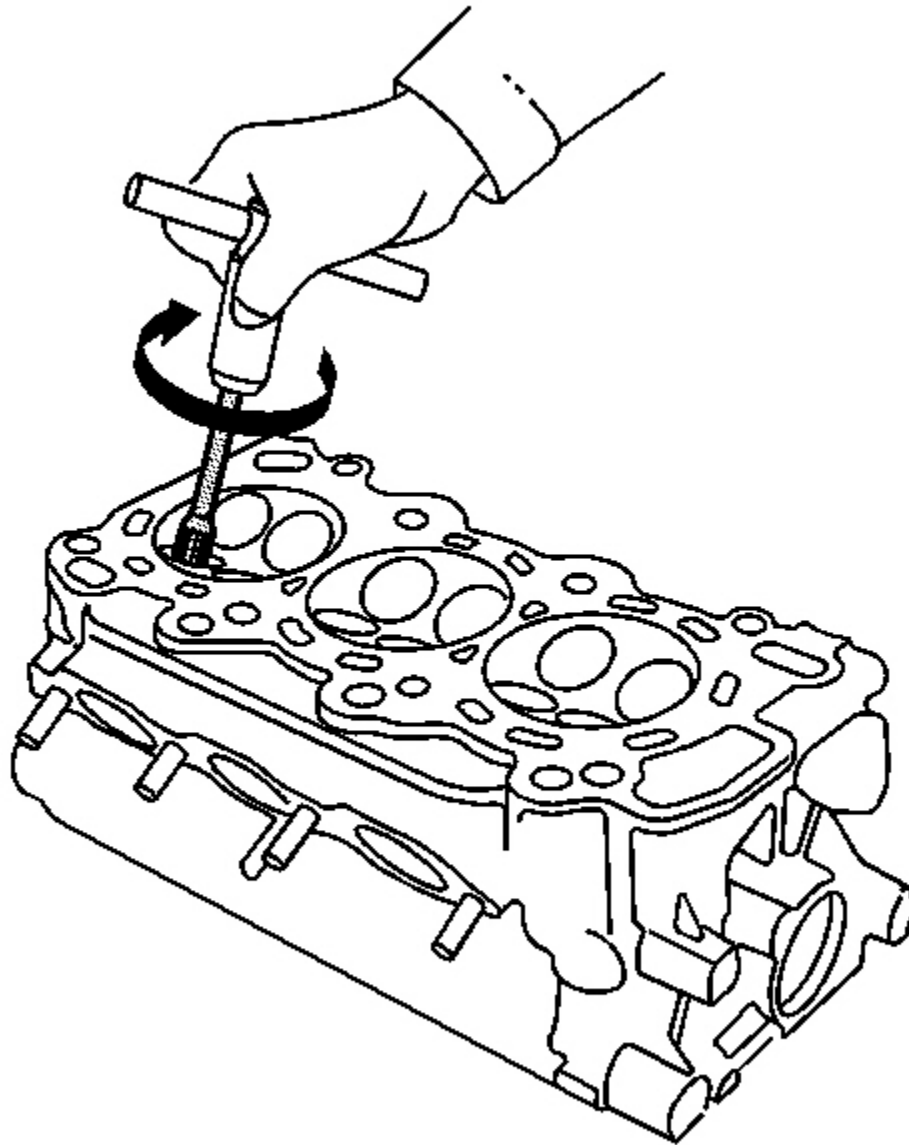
View Of Reamer Clockwise While Removing From The Guide Bore
